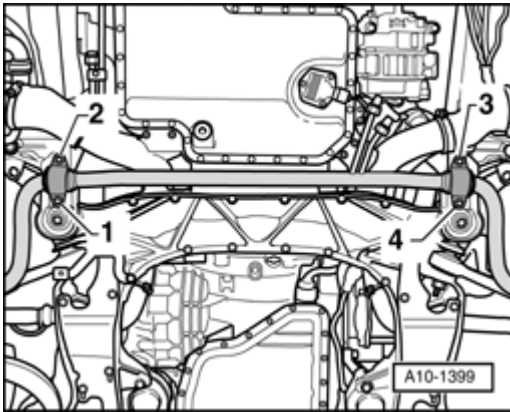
Removing Nuts For Left/Right Stabilizer Mounts
